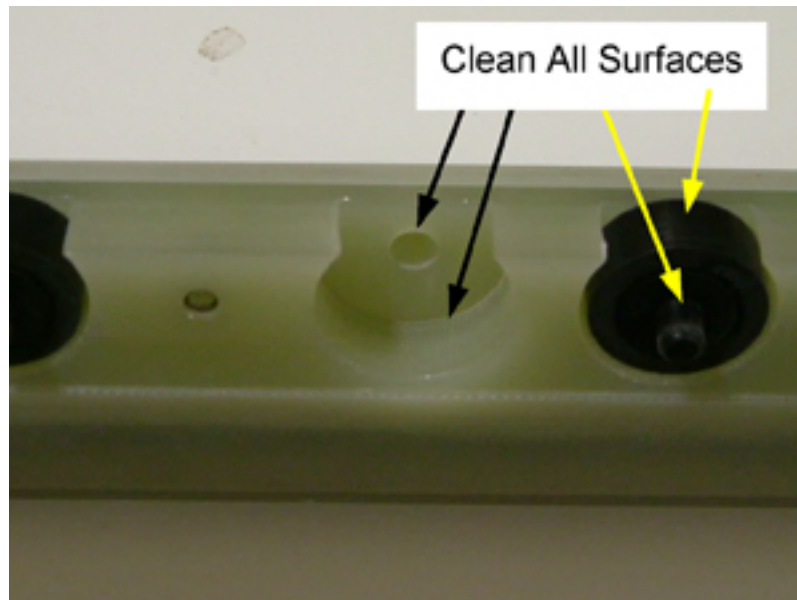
WHEEL CAVITY / SHAFT HOLE
